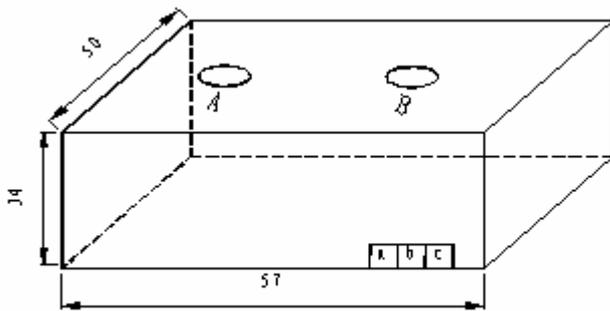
Structure dimensions of CT2 (φ10 through hole)
